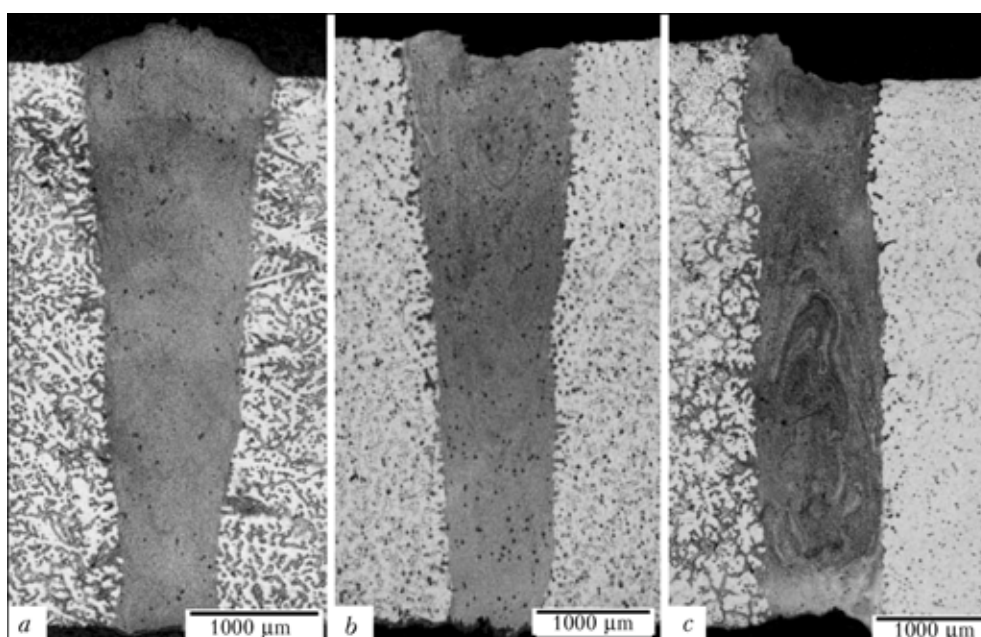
Macrosections of butt-welded joints of similar and dissimilar alloys: a — AZ91–AZ91; b — AM50–AM50; c — AZ91–AM50
